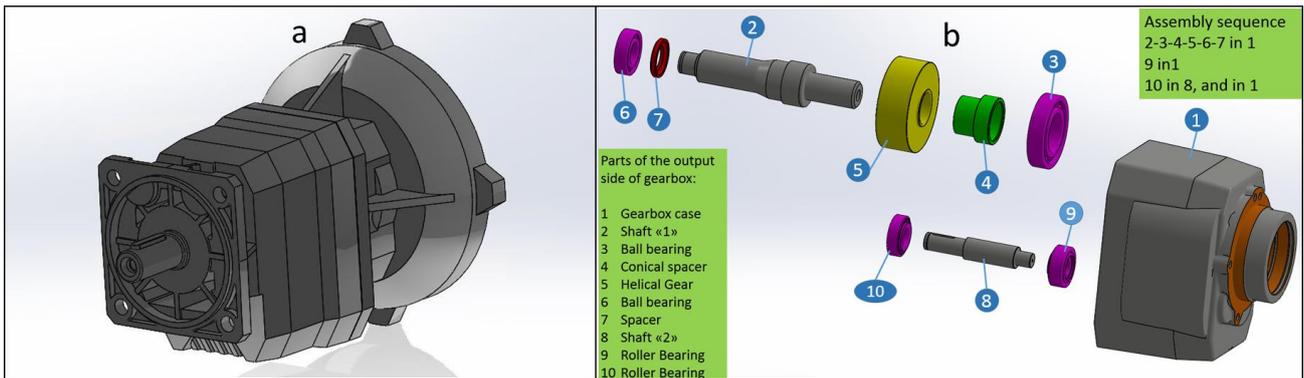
Gearbox assembly: a. original model; b. assembly sequence
